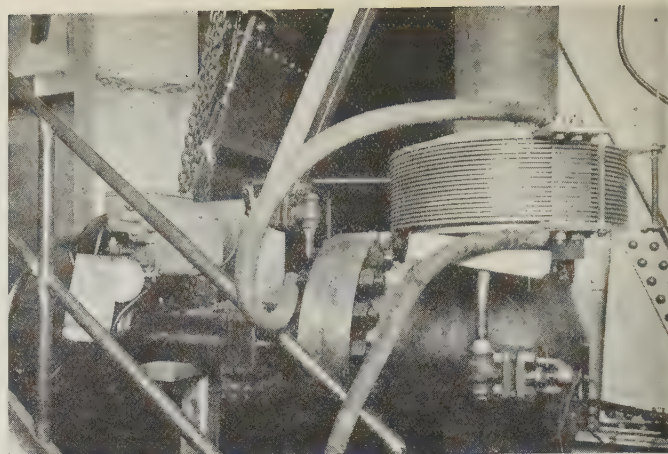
Stress-relieving coil on welded joint in 10 inch main superheated steam line
